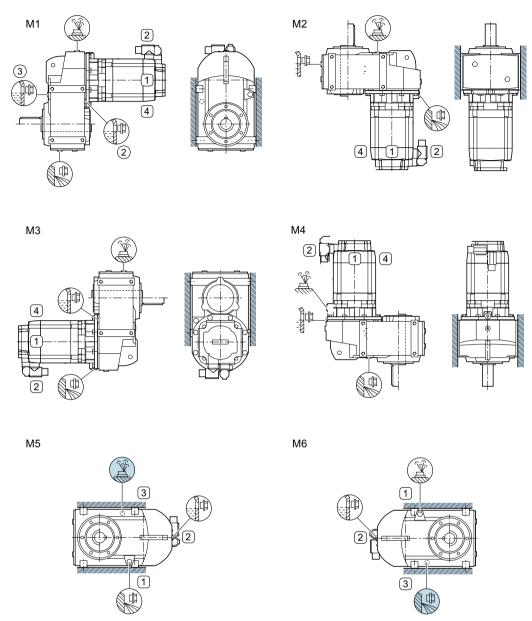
Mounting positions for servo parallel shaft geared motors FZ and FD, foot-mounted design, frame size 39 - 129, 2 stage and 3 stage
